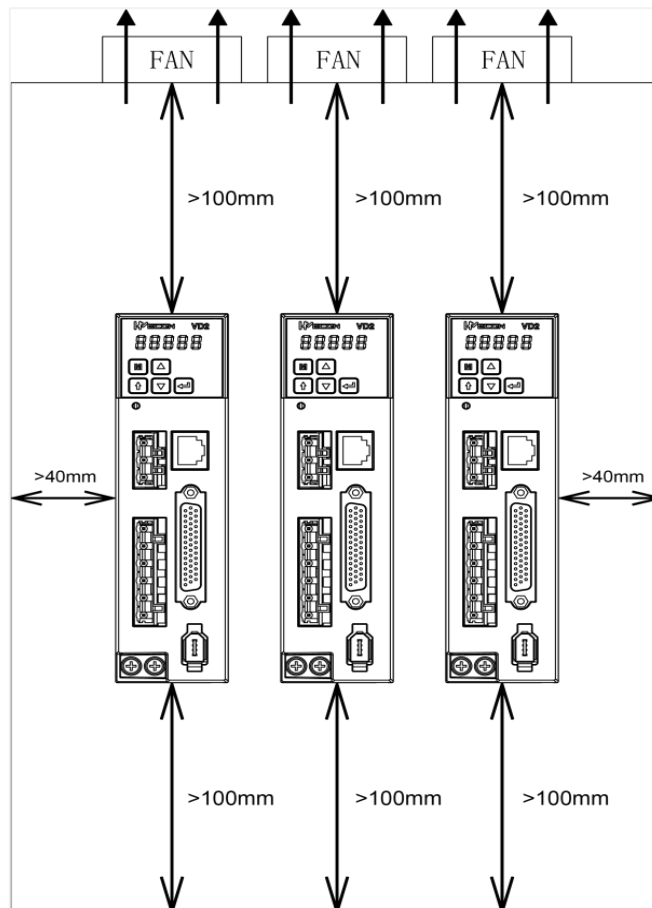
Parallel installation dimensions of multiple VD2A drives
